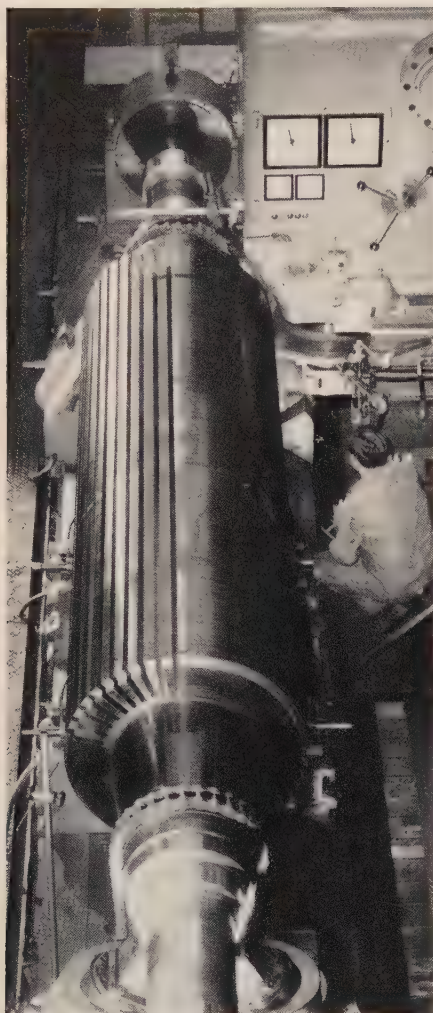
Milling the winding slots in a generator rotor. The rotors are manufactured on a special production line. Pits are arranged in the immediate vicinity for balancing and over-speed tests. The largest can accommodate rotors weighing up to 130 tons
